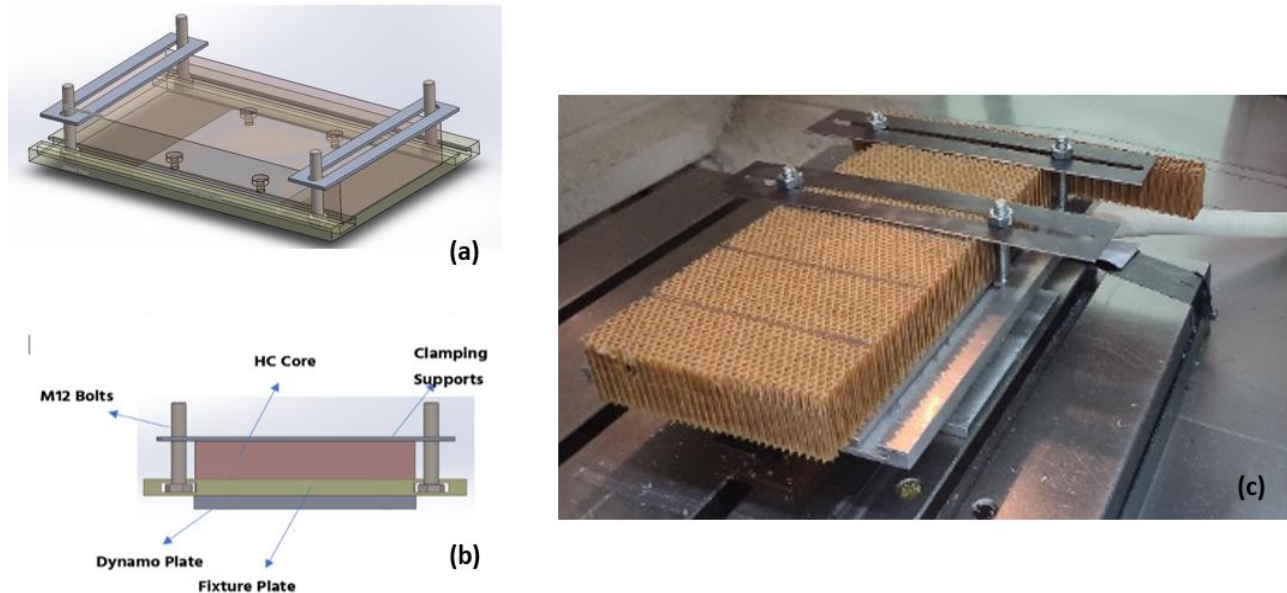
(a) Isometric view of Fixture Plate; (b) Front view of fixture plate; (c) Actual Experimental Setup
